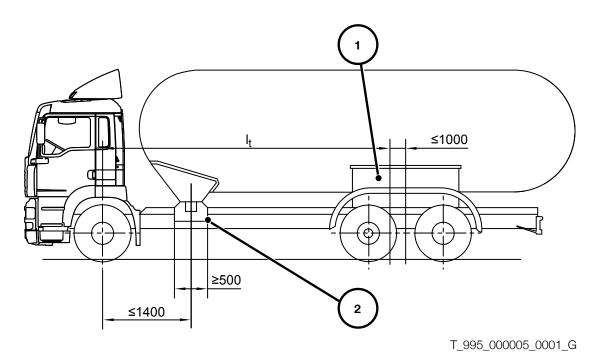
IV: Front pendulum mounting Fig. 35-IV: Front elastic mounting
